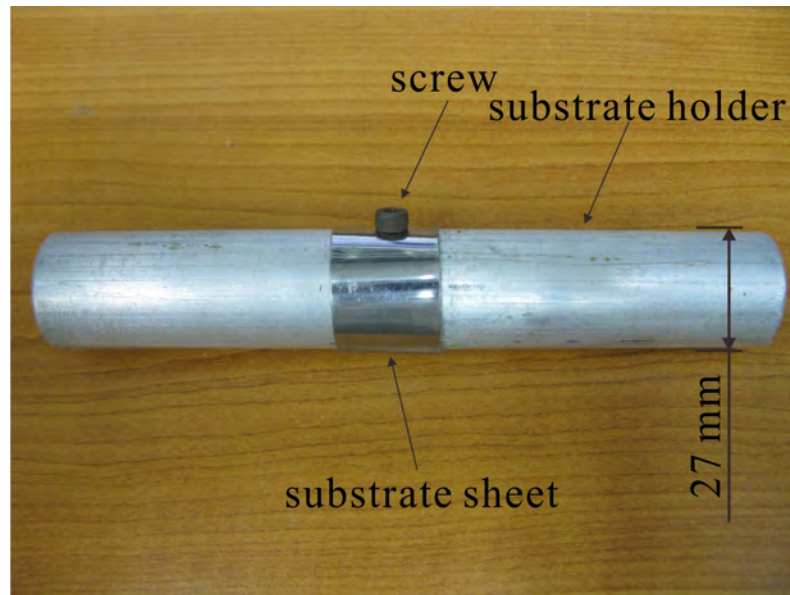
The fixing of substrate sheet around the cylindrical holder
